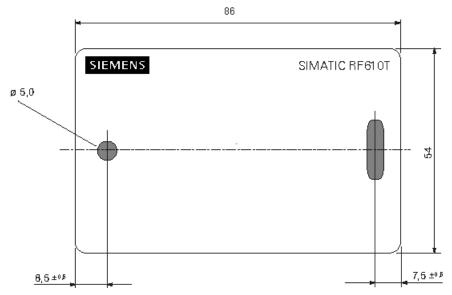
Dimension drawing SIMATIC RF610T (special variant ATEX)
